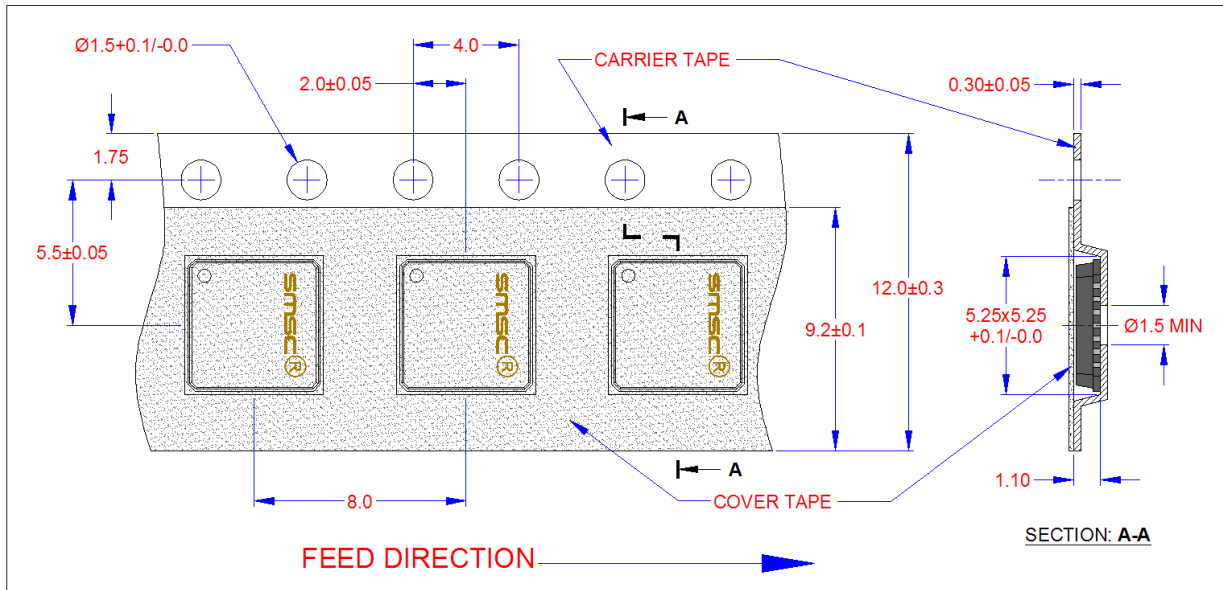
28-Pin Package Tape Dimensions and Part Orientation (mm)
